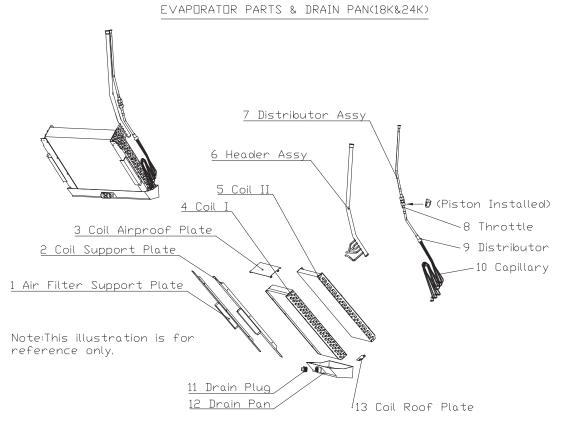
FFMA (sizes 18 & 24) Expanded View- Evaporator Parts & Drain Pan
